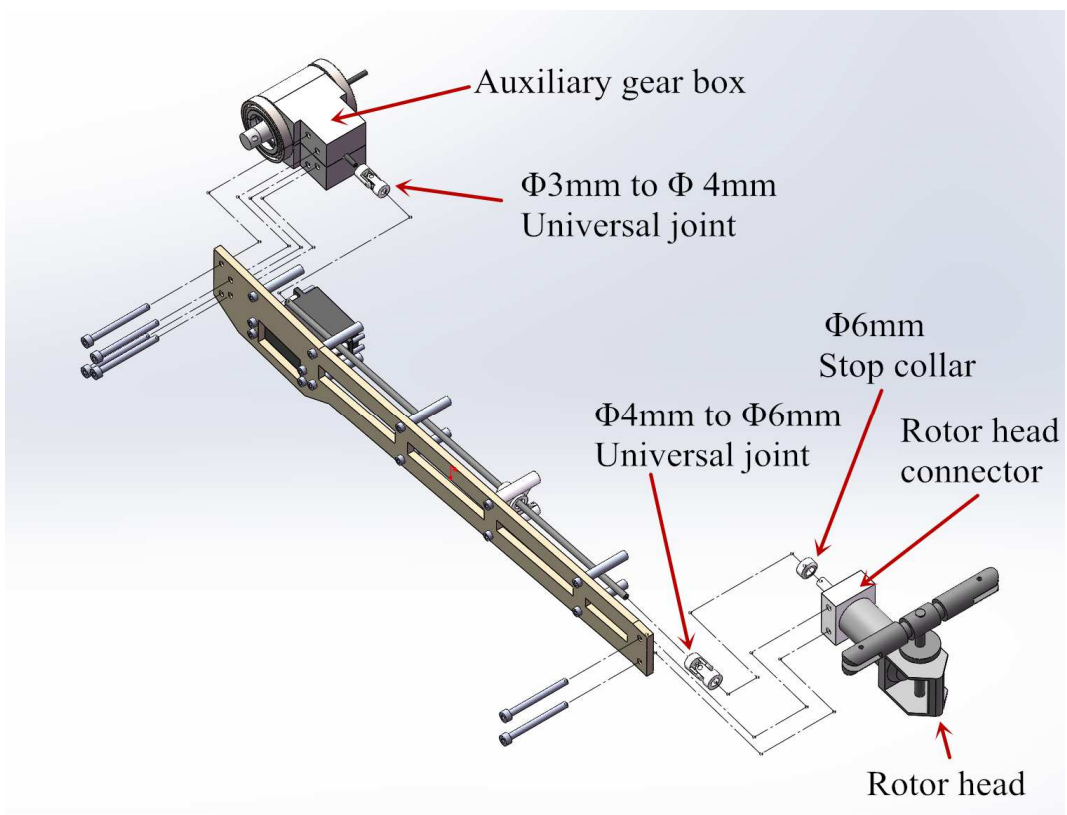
The complete assembly of the rotor head, the auxiliary gear box and the rotor arm
